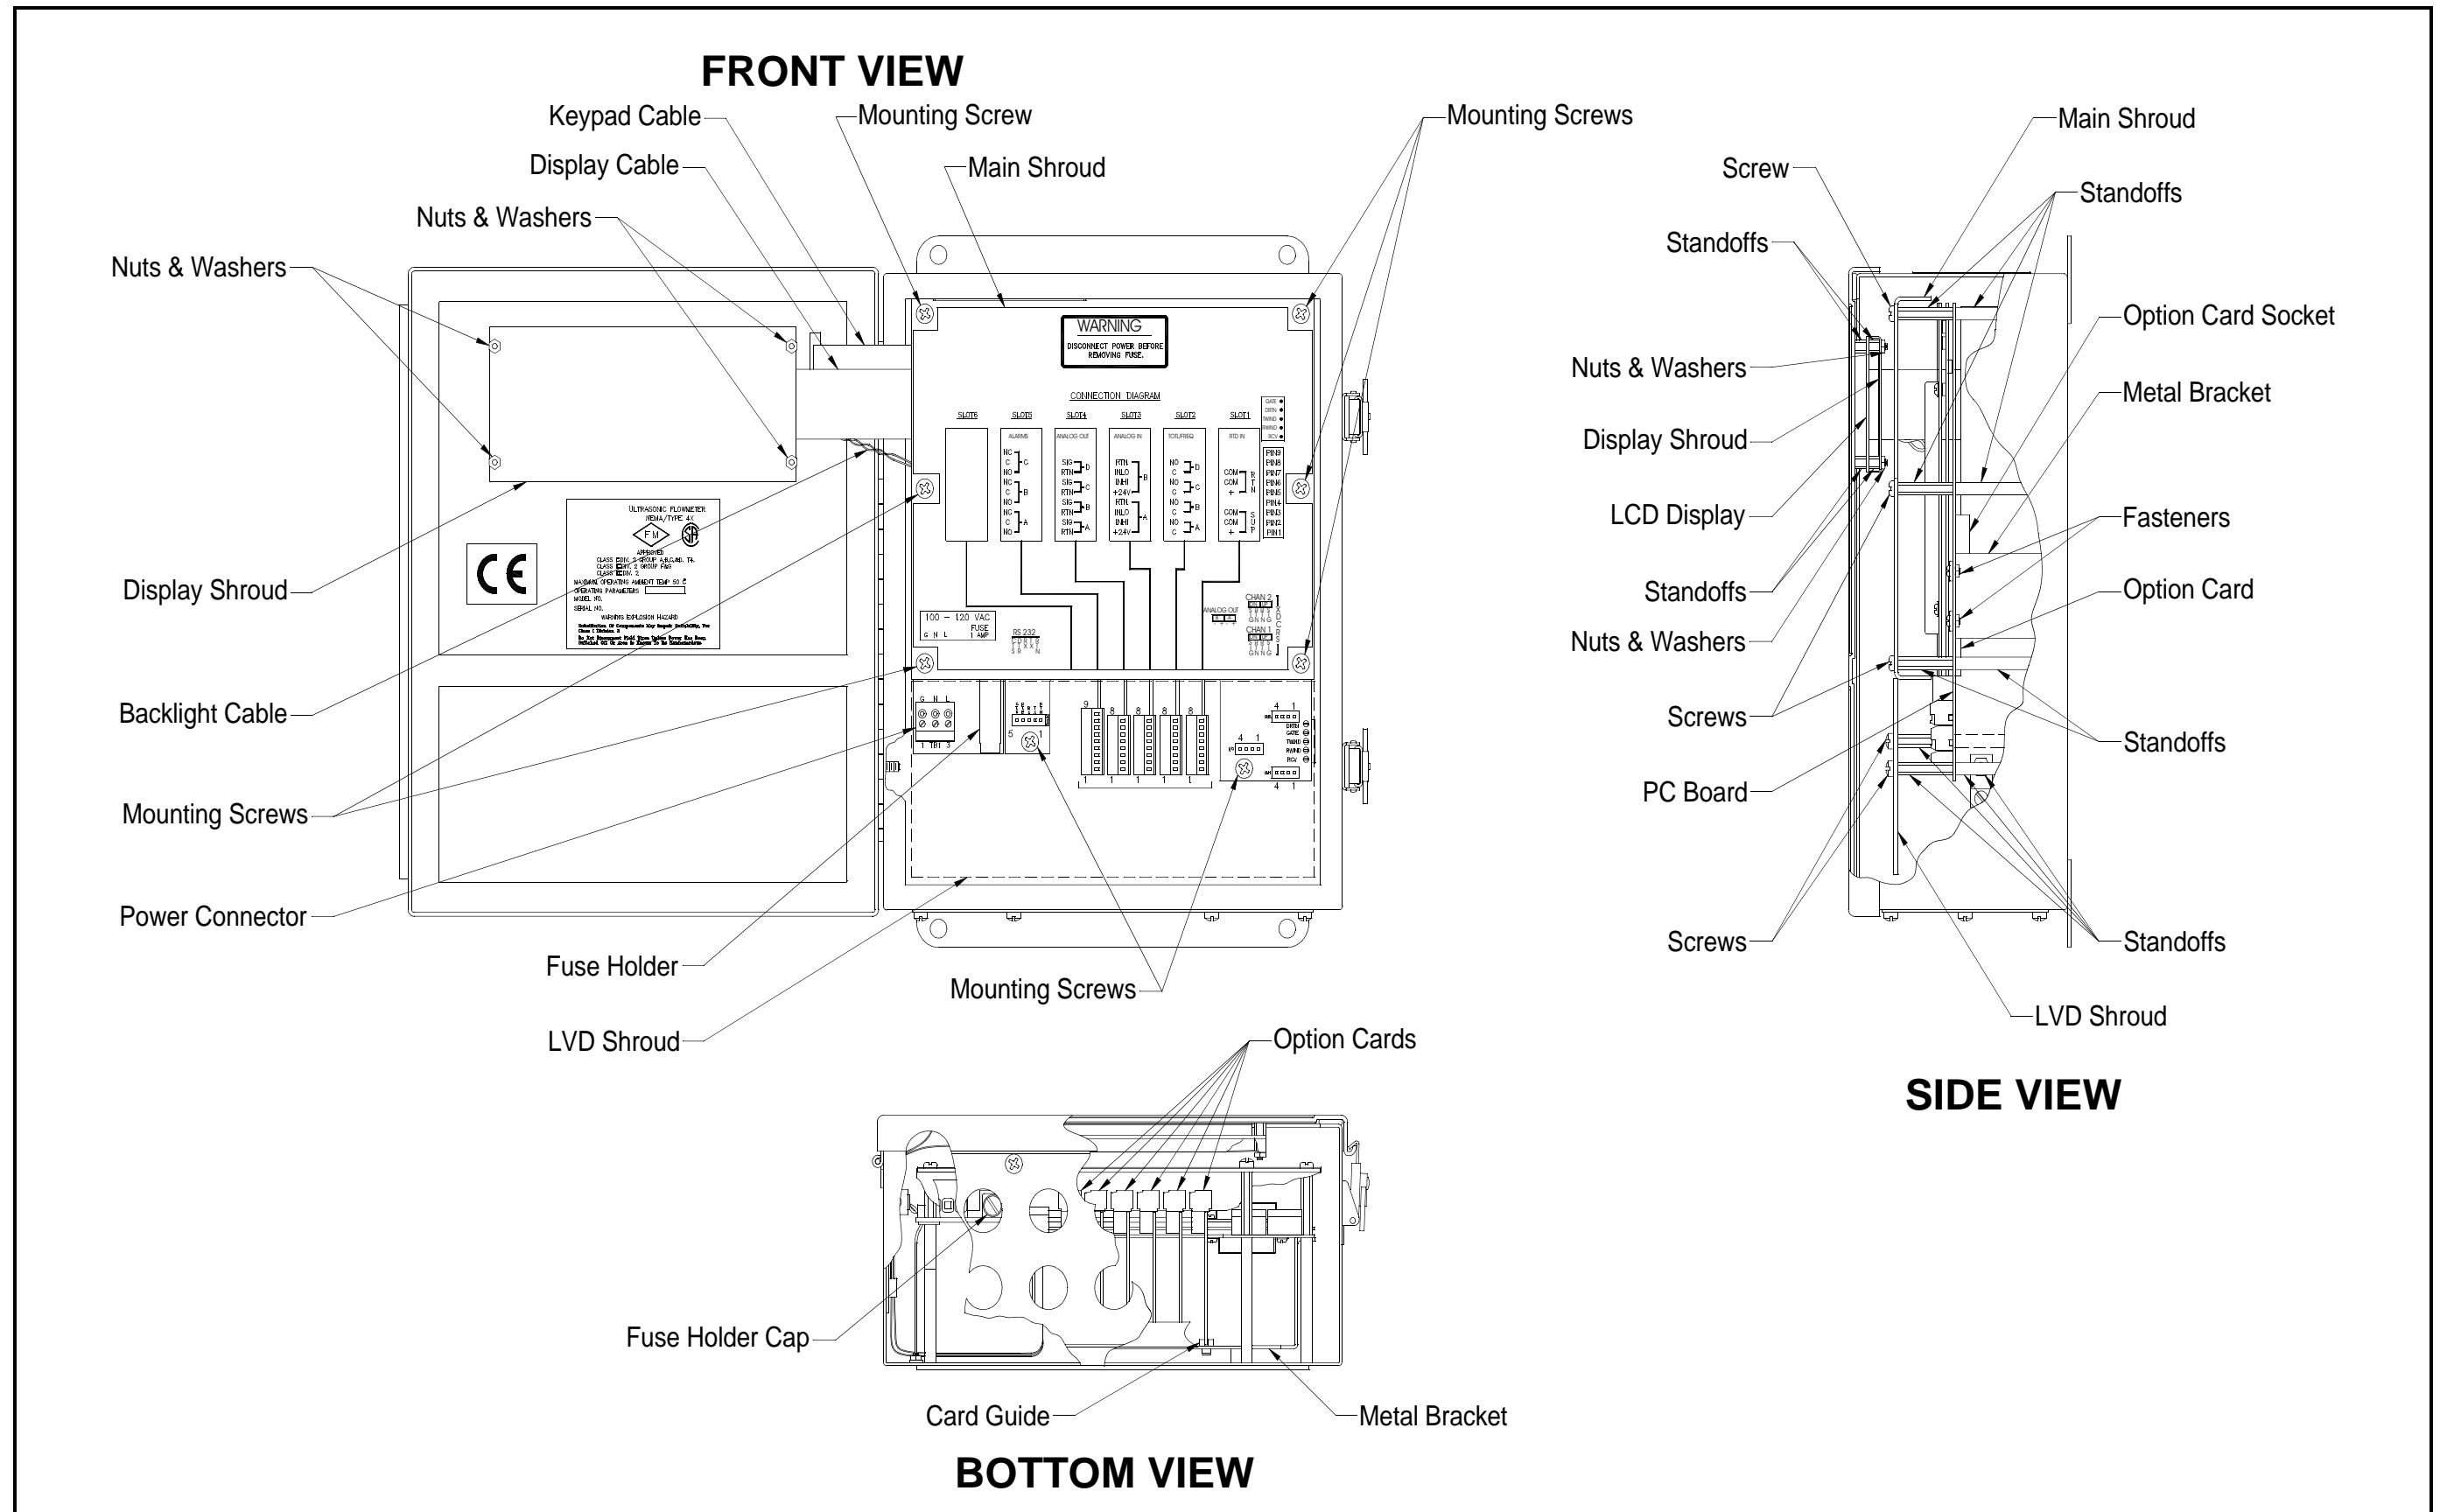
Standard Model DF868 - Electronics Console Assembly
